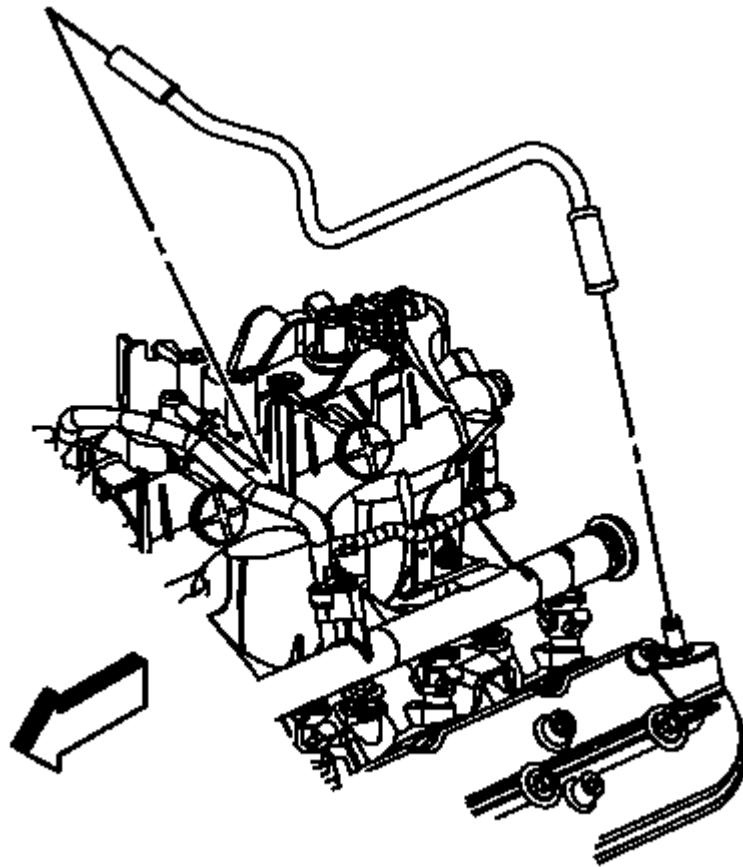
Identifying positive crankcase ventilation (PCV) hose
